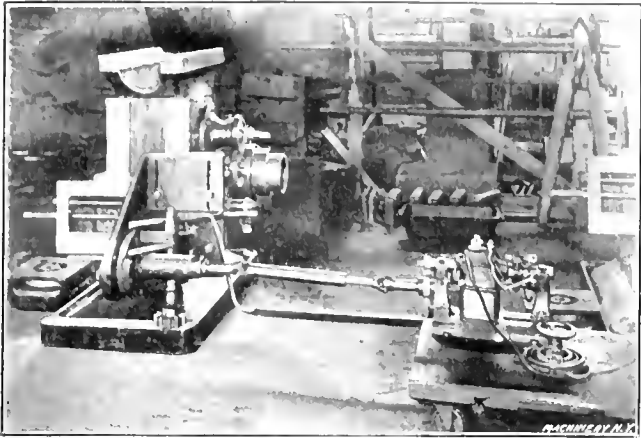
Portable Electrically-driven Milling Attachment for Surfacing Shaper Base
